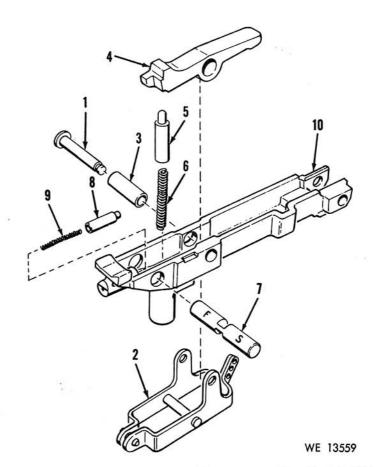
Sear and Safety Housing Assembly-Exploded View.
